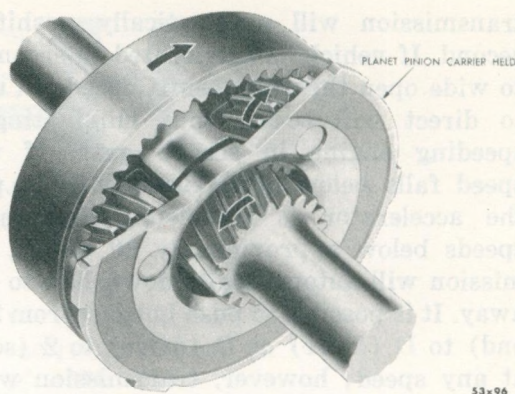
Planetary Gear Set (Planet Pinion Carrier Held)—Reverse
